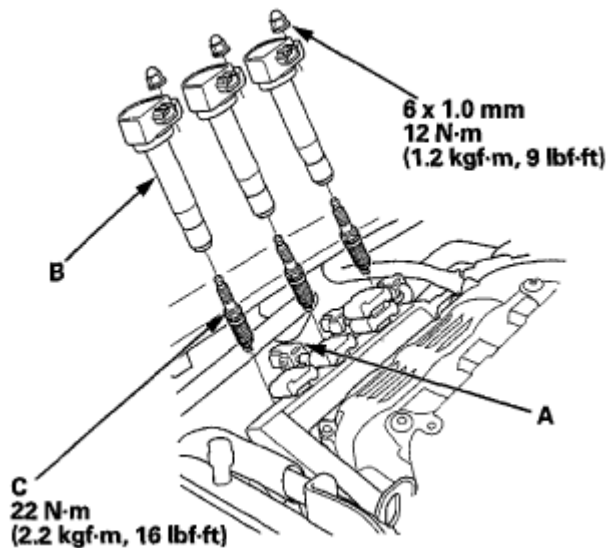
Identifying Ignition Coil Connectors And Ignition Coils With Torque Specifications (FRONT)
